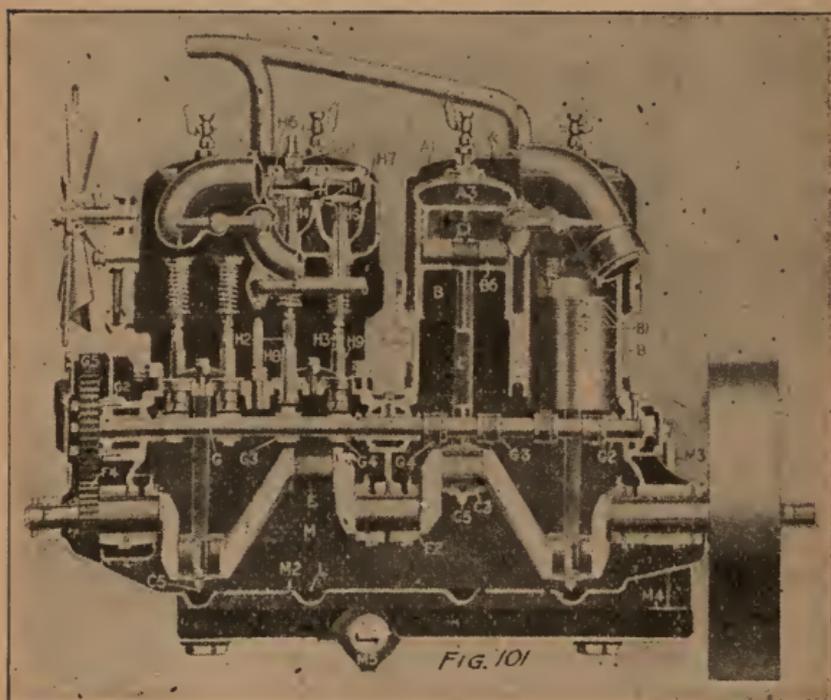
Section through typical tractor engine, showing points where oil is necessary.
